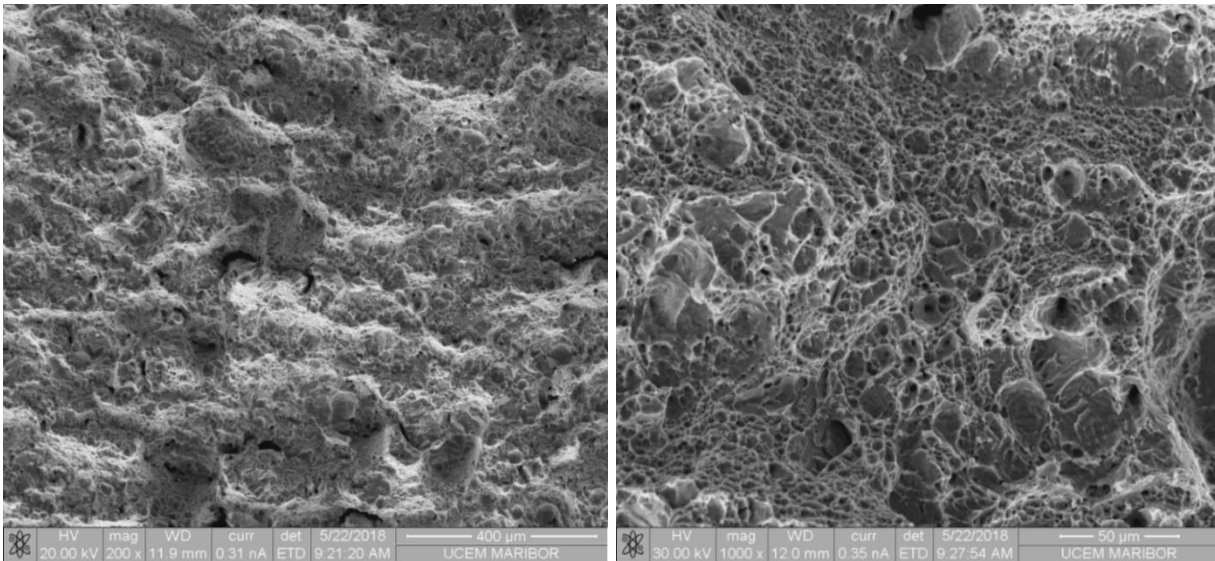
16 Fracture surface of the WTCS specimen at 100x (left), 500x (right)
